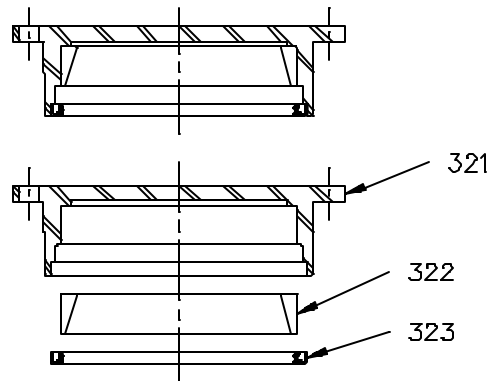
Upper Pinion Shaft Bearing Cap Assembly [320]
